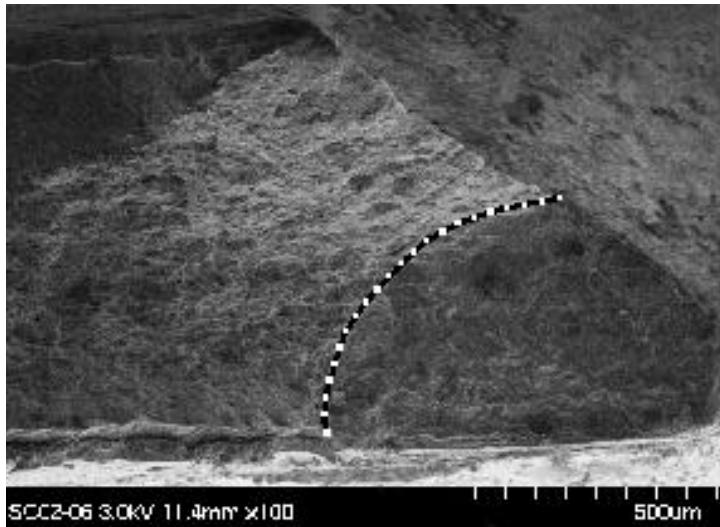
Typical corner crack from countersunk rivet hole
